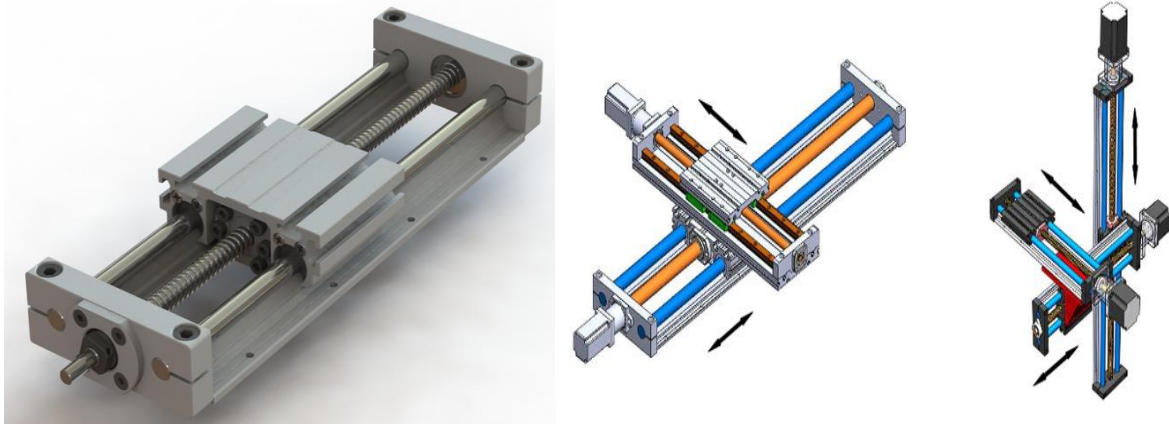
Similar mechanical design, Applications of mechanical designs in machine tools with servo motor integration(horizontal and vertical)(doguskalip.com)
